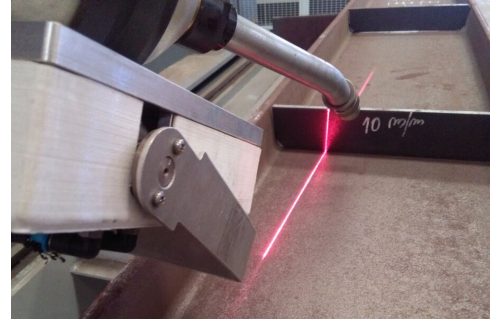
Detection of the joint to be welded using the 2D laser scanner
